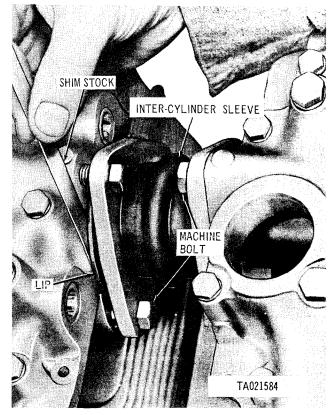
Installing camshaft intercylinder hose flange bolts.
